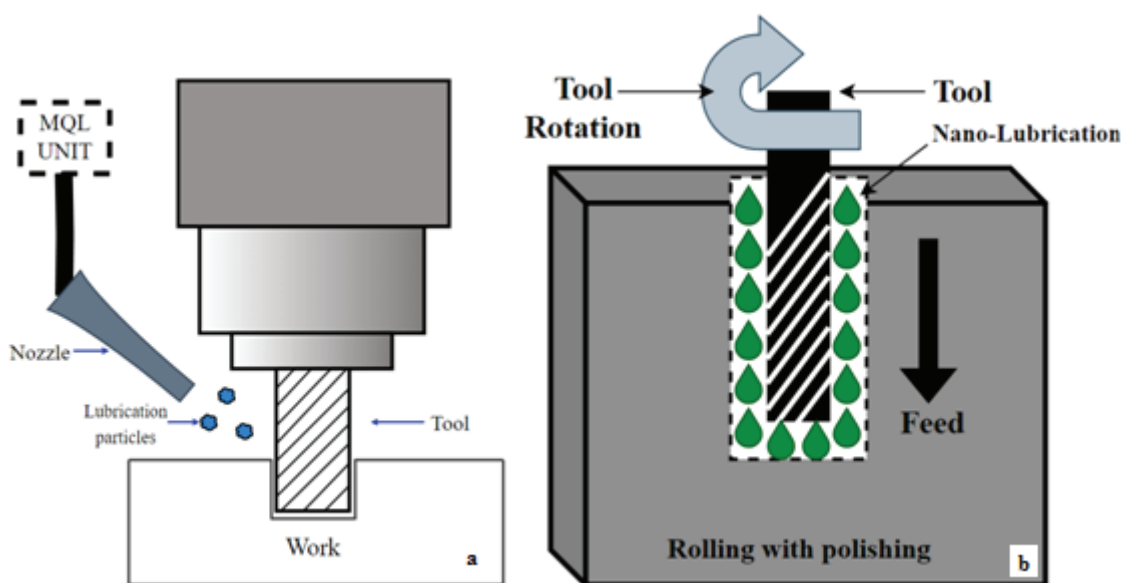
(a) MQL system setup for external lubrication (b) Visualization of MQL between tool-workpiece on performing drilling. Reproduced from Hisham et al. [40] by the authors.
